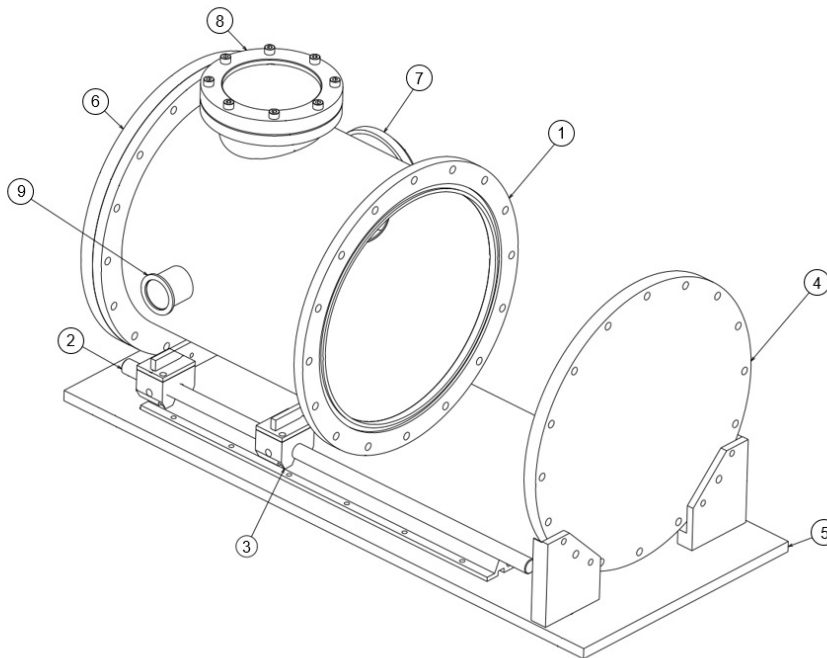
Main components of the vacuum vessel: (1) main vessel housing; (2) guiding rail; (3) gliding carriage; (4) main flange; (5) support board; (6) back flange; (7, 8) ports for sight windows; (9) vacuum port.
